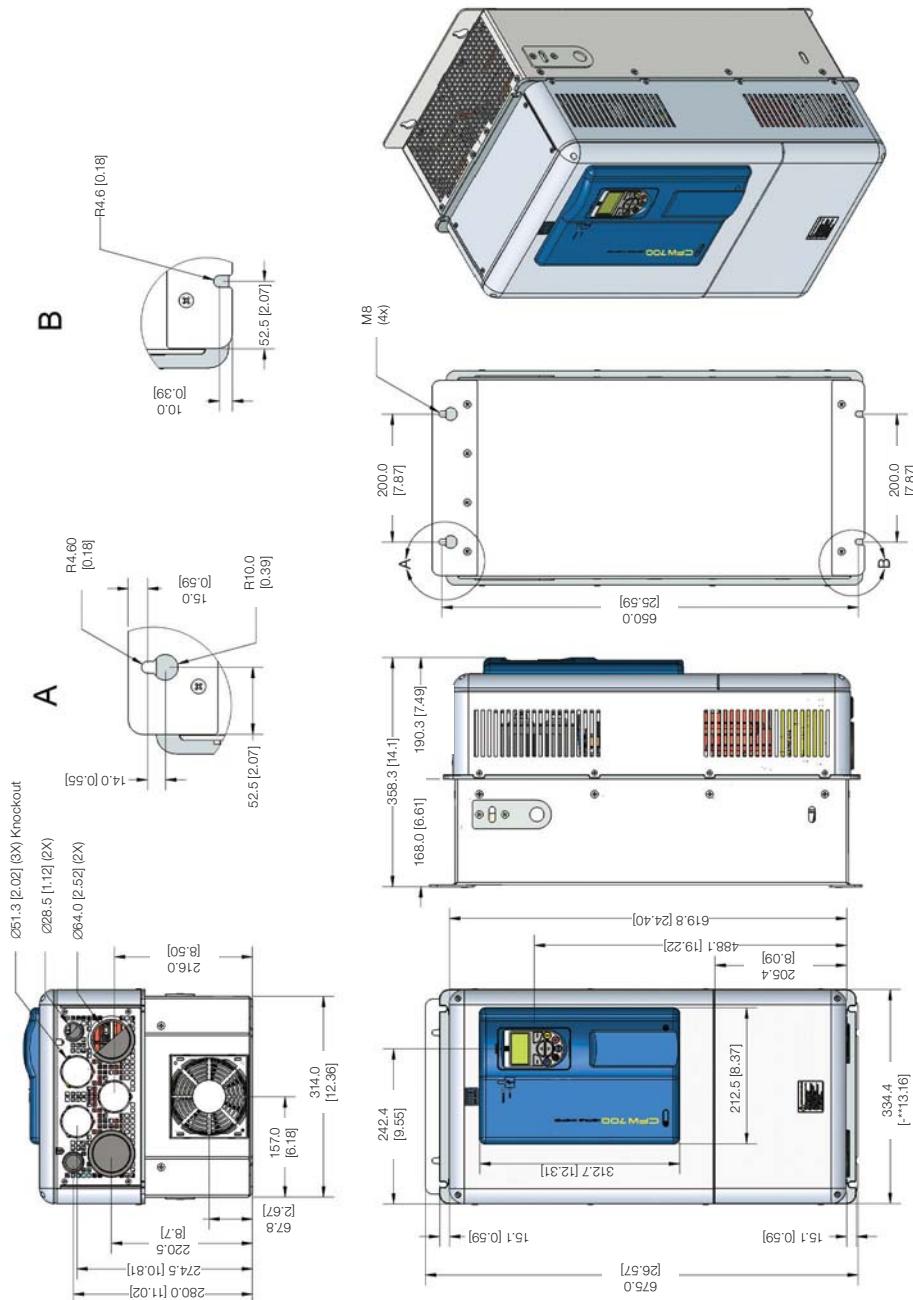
Inverter dimensions in mm [in] - frame C
